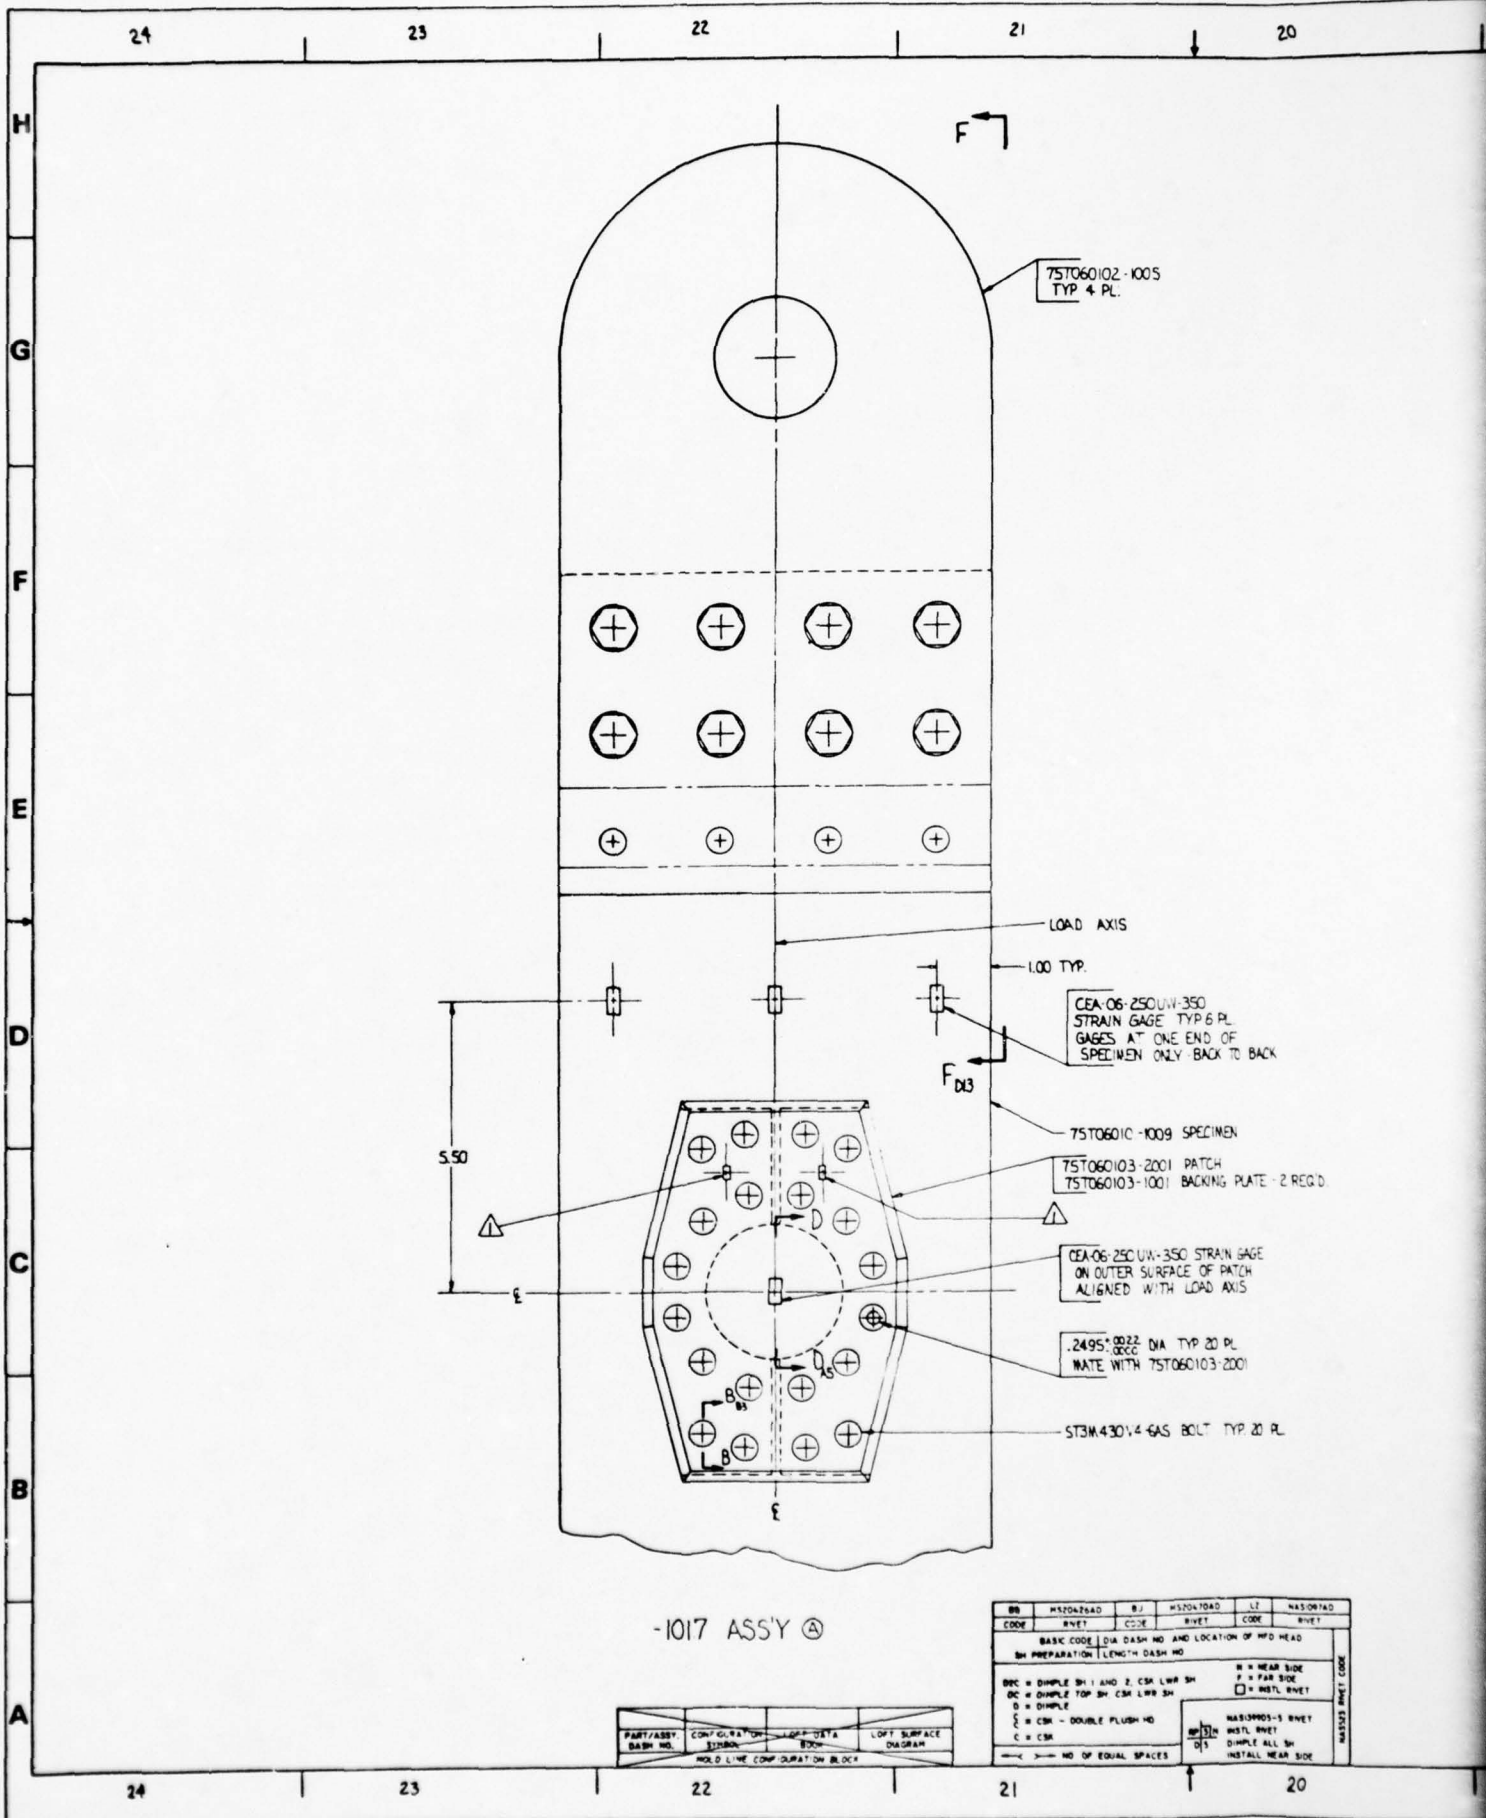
DETAILED DRAWING OF REPAIR ASSEMBLIES
